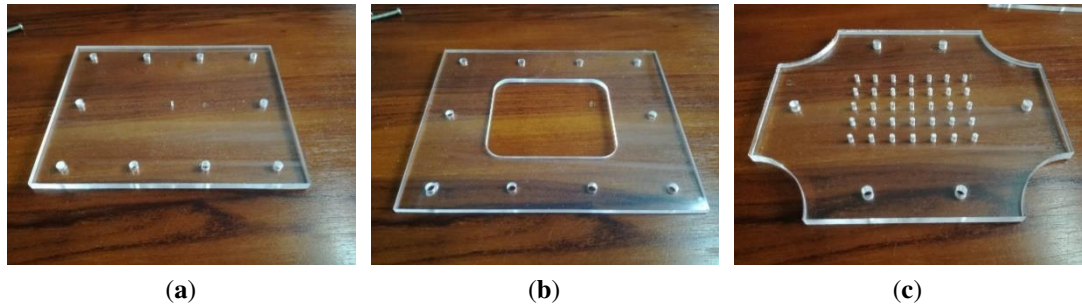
Mould fabricated using perspex: (a) Bottom layer; (b) Middle layer; (c) Top layer.
